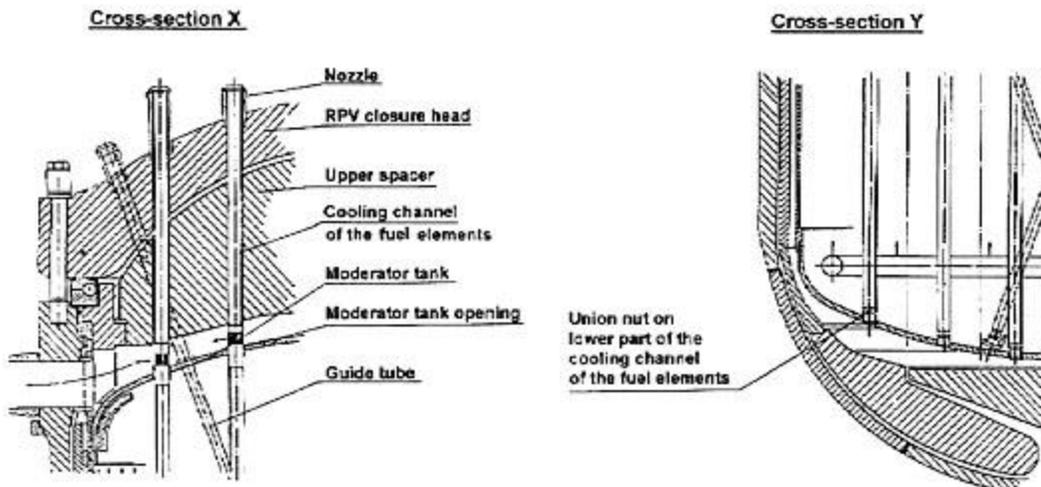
Rod-shaped components above and inside the RPV: Cross-sections X and Y
